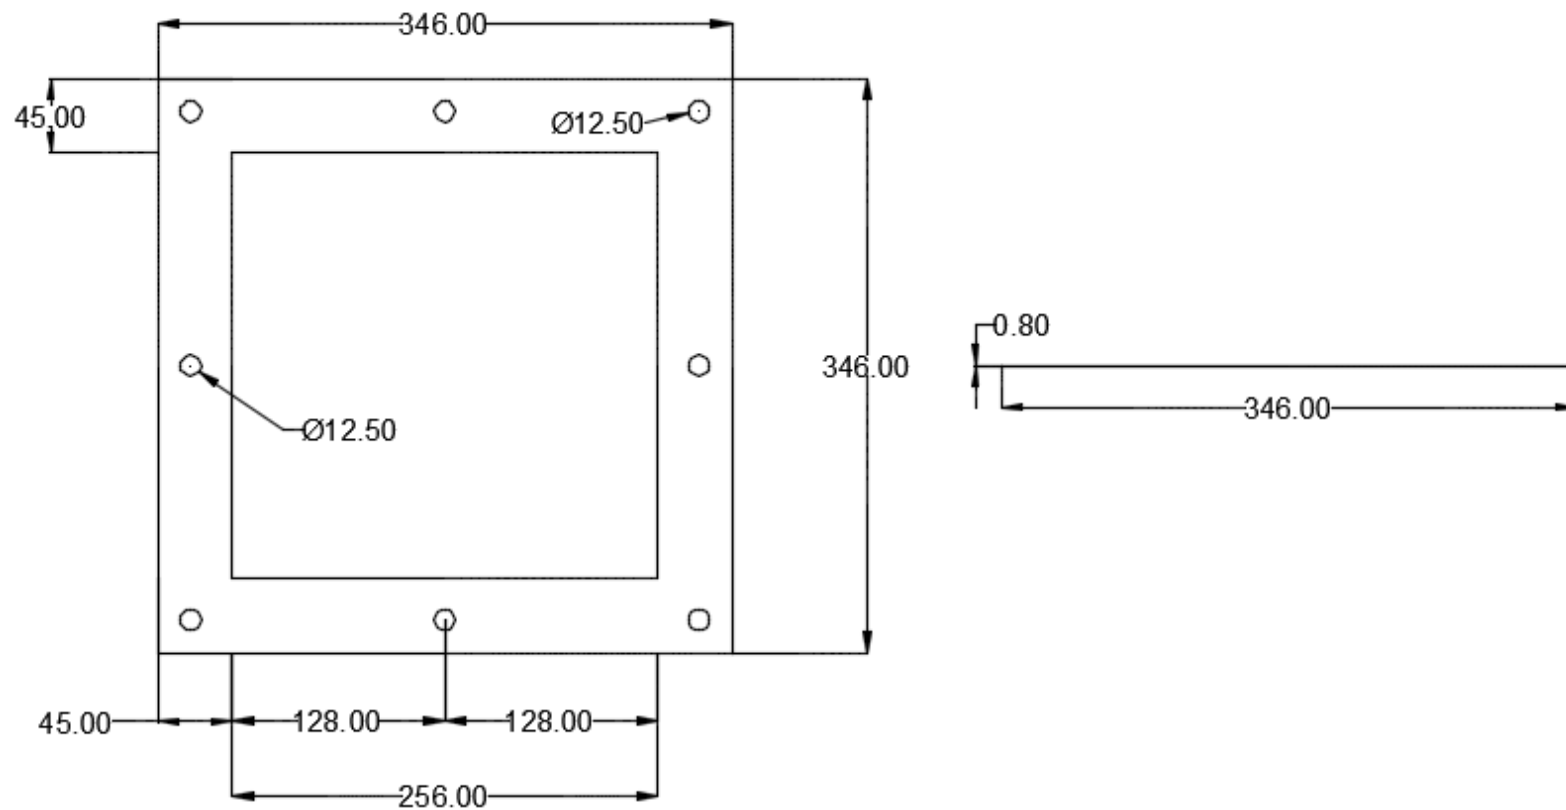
Sketch showing the dimensions of picture frame in vacuum assisted resin transfer moulding (VA-RTM) system. All dimensions are in mm.
